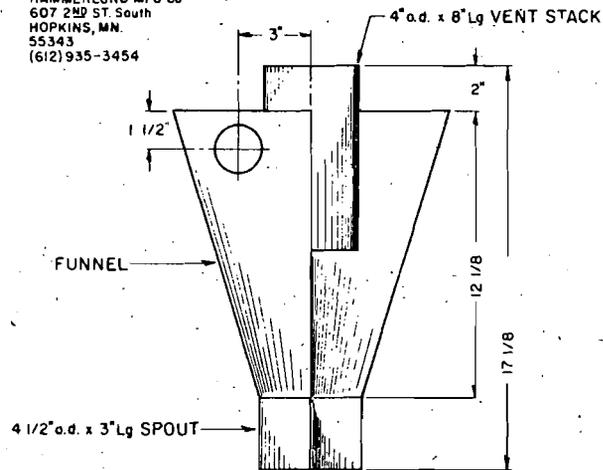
CYCLONE RECEIVER WELDMENT
